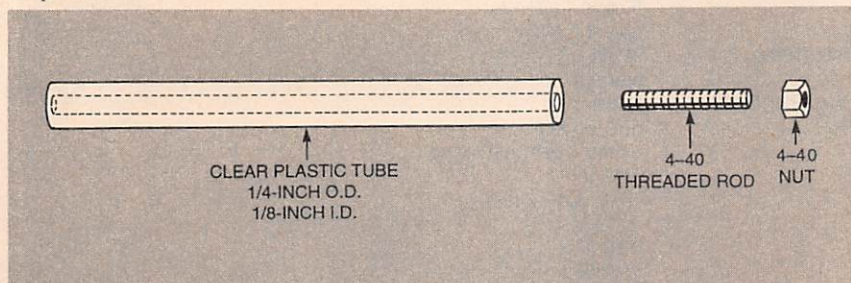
The special hold-down screws for the Phone Troll are easily made from a piece of plastic tube and a length of threaded rod. You can easily make the threaded rod by cutting off the head from a 4-40 screw.
